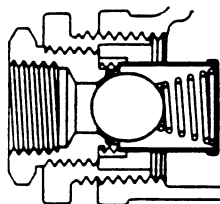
Horizontal installation in either end or side outlet of tee, showing use of reducing bushing.
